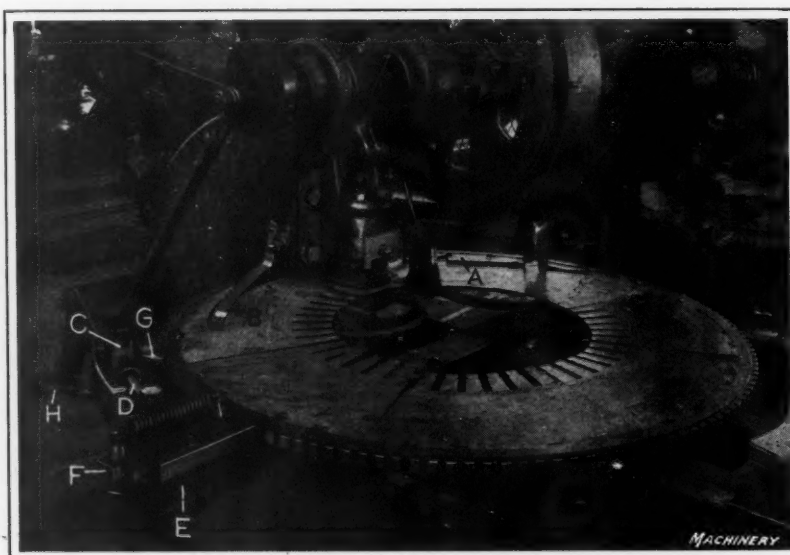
Notching Press equipped with Automatic Indexing Mechanism, for punching out Slots in Large Motor Stampings
